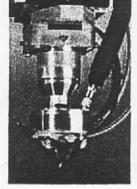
Hybrid welding torches for fine and heavy duty (Frauhofer Laser Inst.) 26)
